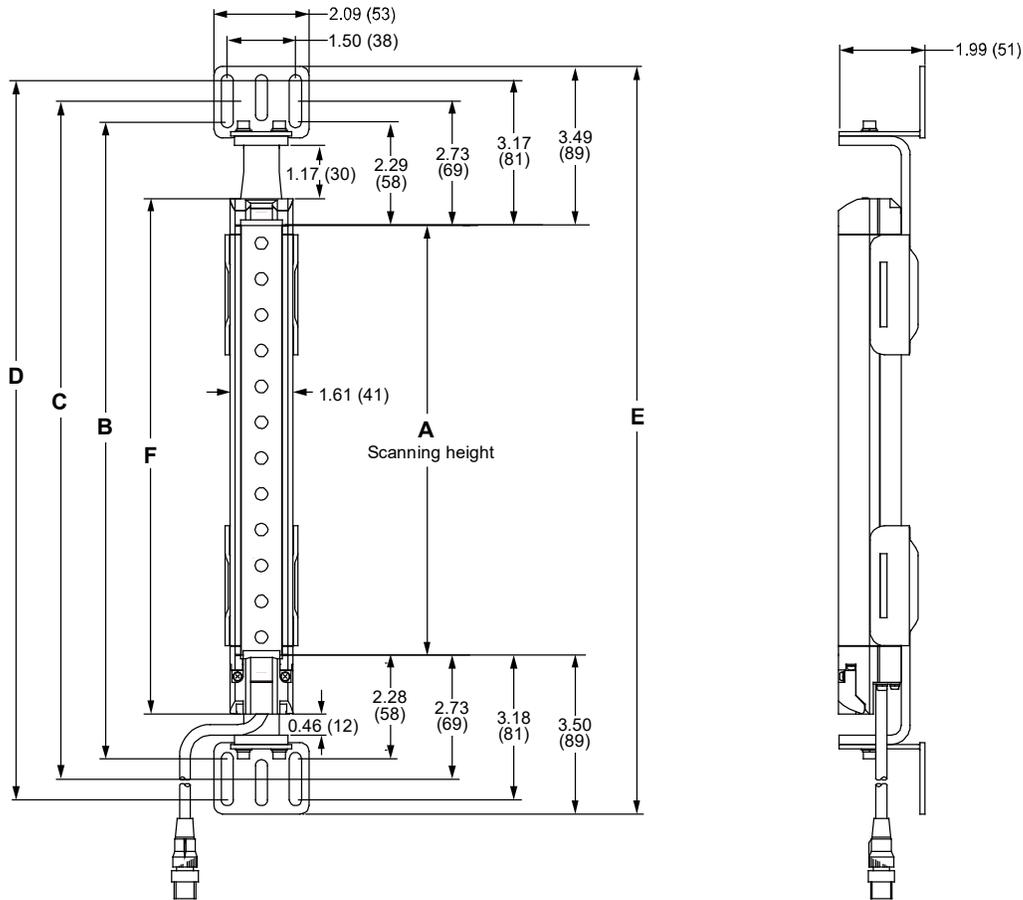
Shadow 9 Optic Heads: Mounting Dimensions
